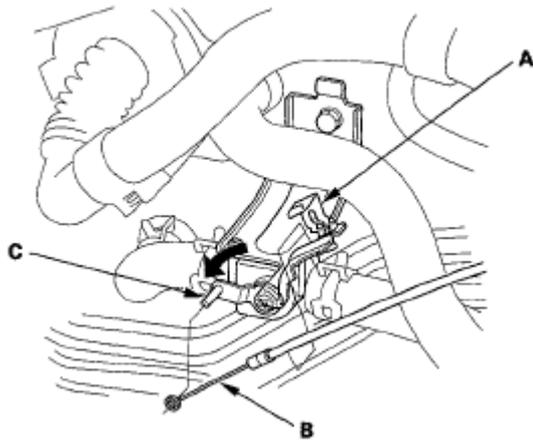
Identifying Heater Valve Cable And Heater Valve Arm
